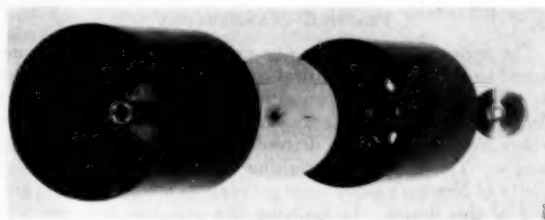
IMPELLER, DECOUPLING DISK, TURBINE, AND RESTRAINING SPRING
